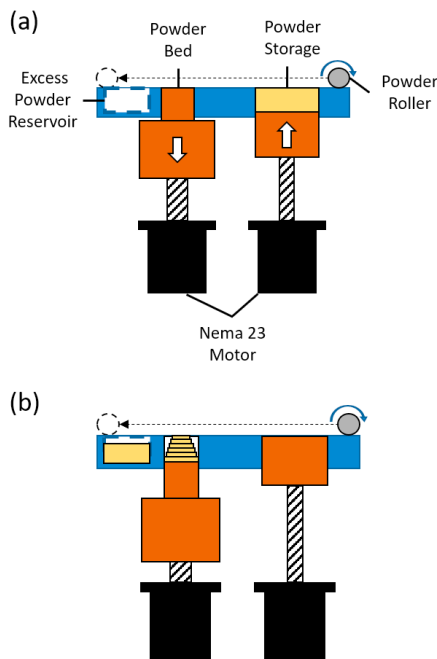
The inkjet printing subsystem: (a) Prior to print; (b) After print
